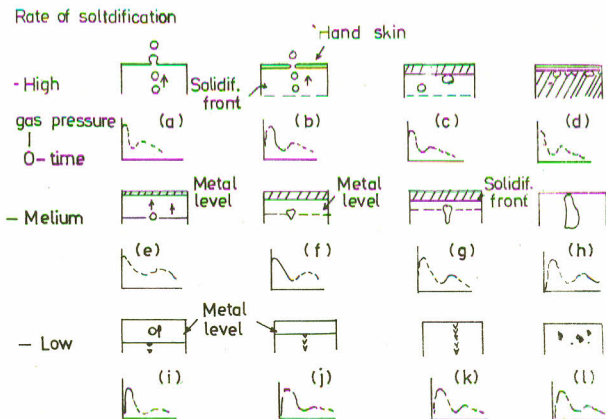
Correlation between gas pressure developed in the mould cavity and physical morphology of gas defects in castings.
